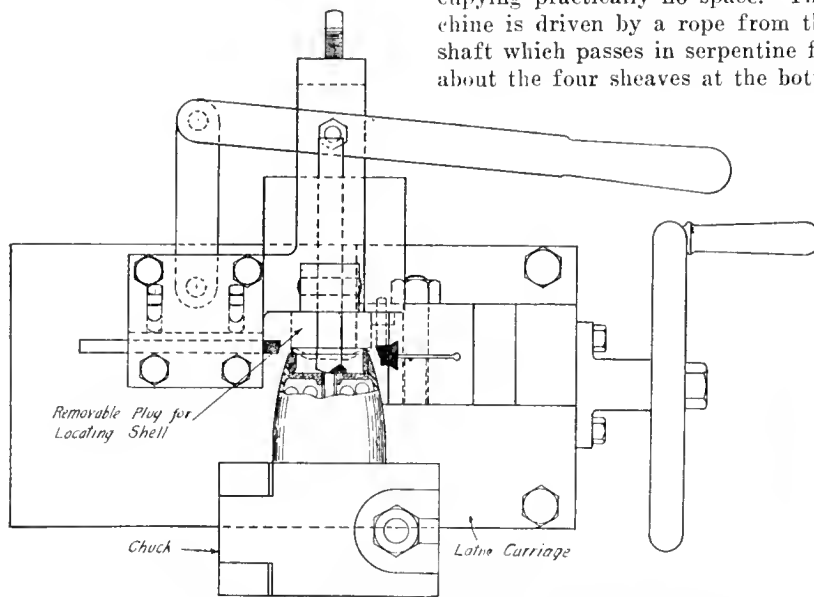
PLAN OF TOOL CARRIAGE ON SOCKET TURNING LATHE.
